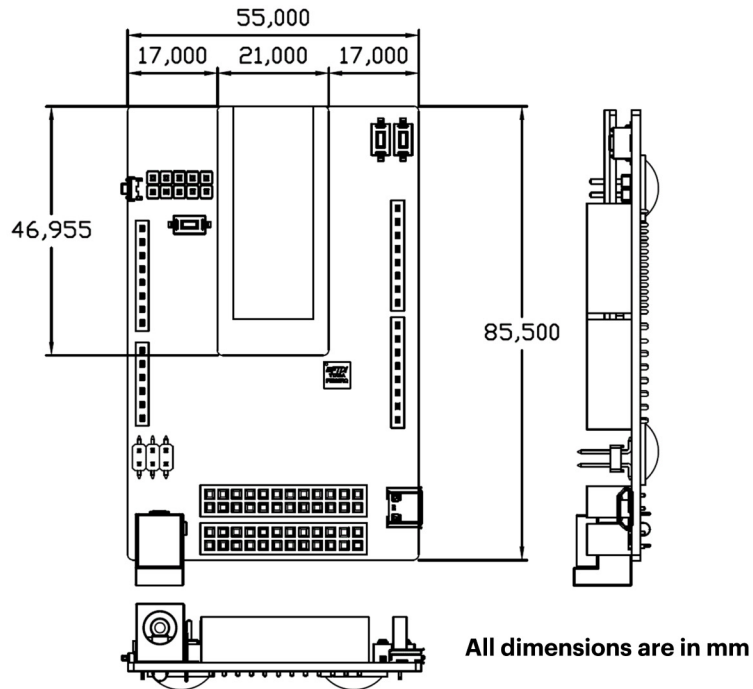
ARTIK 053s Starter Board Mechanical Specifications
